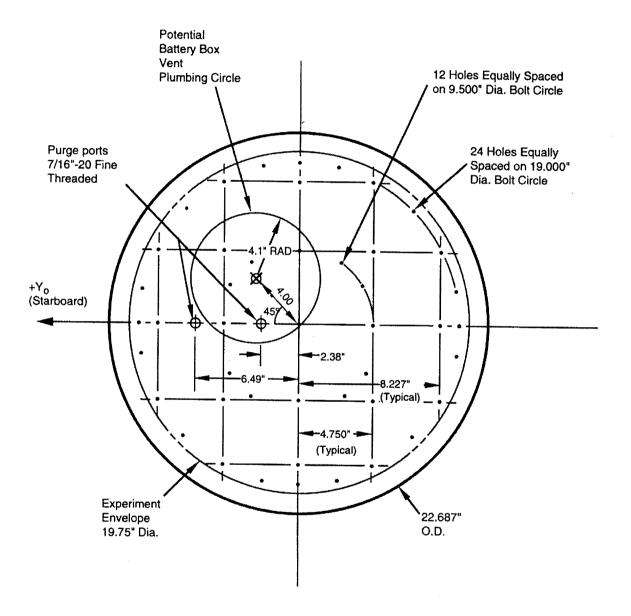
HITCHHIKER SEALED CANISTER (UPPER END PLATE)
